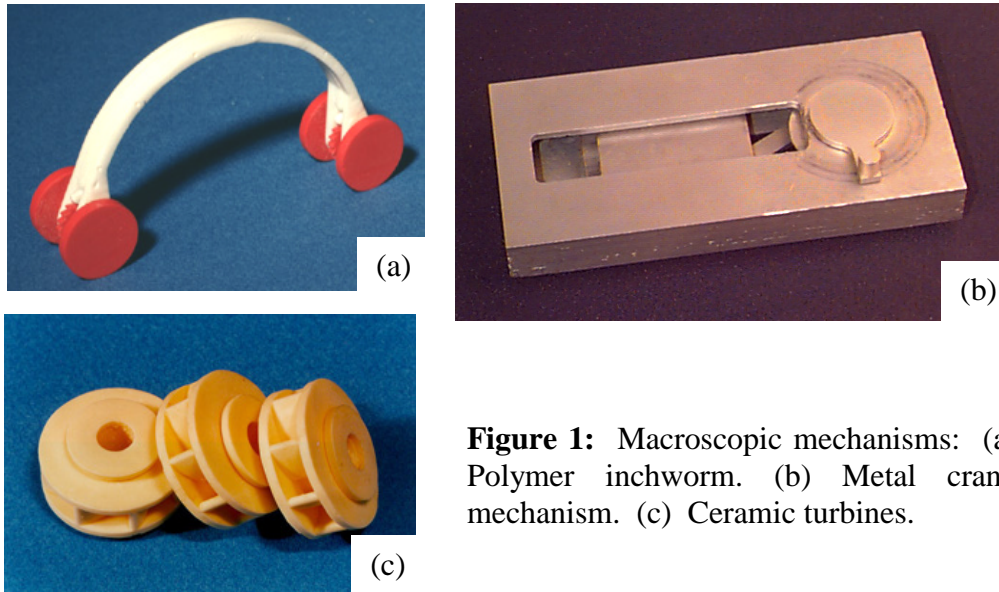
Macroscopic mechanisms: (a) Polymer inchworm. (b) Metal crank mechanism. (c) Ceramic turbines.
